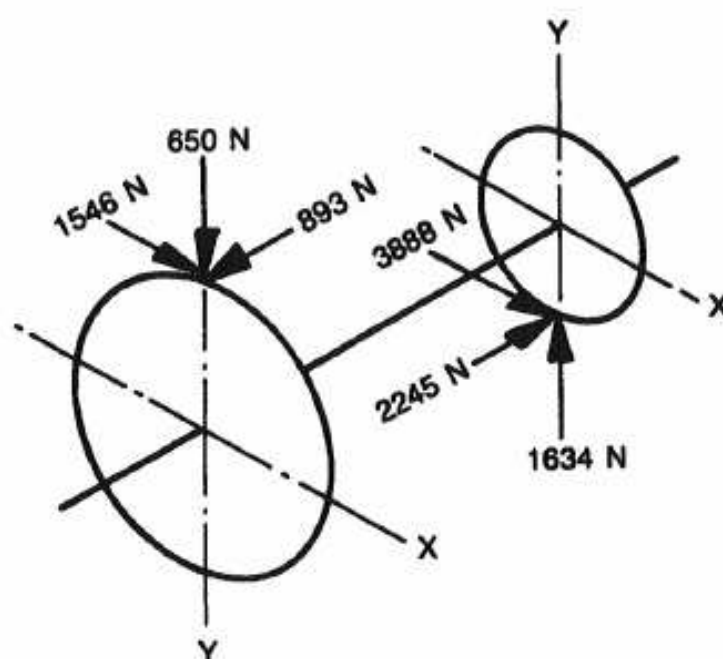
GEAR FORCES ACTING ON SHAFT 2
